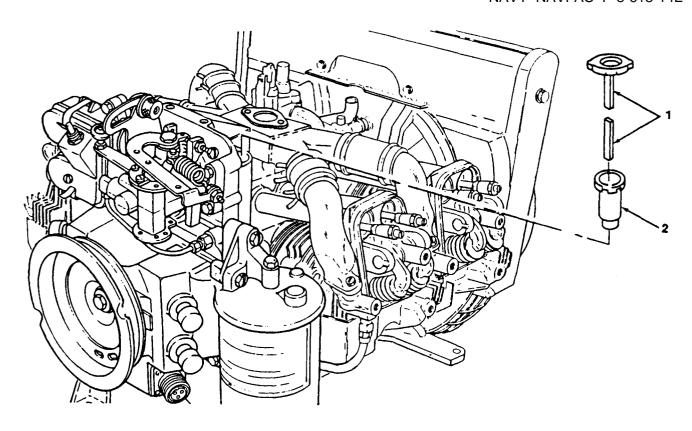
Oil Filler Tube and Gage, Replacement.
